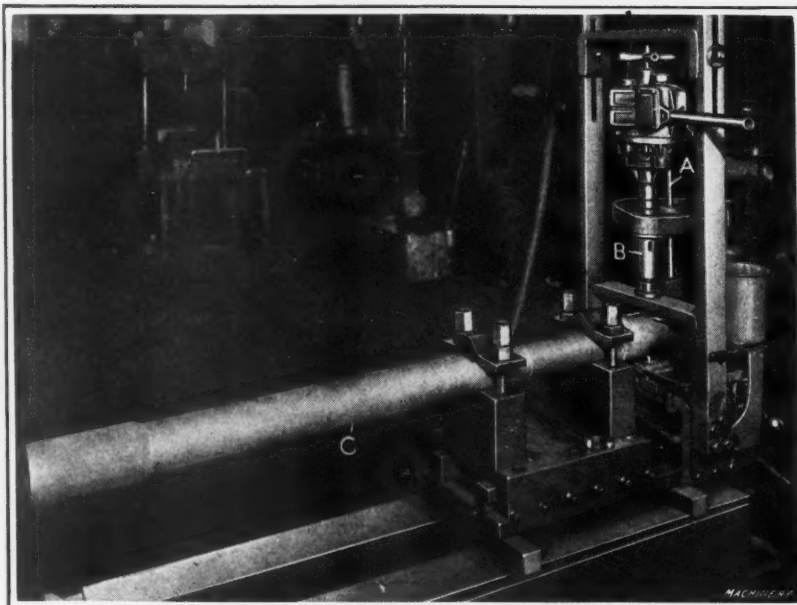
Special Machine developed for Use in milling the Cross-head Key-slot in a Piston-rod
